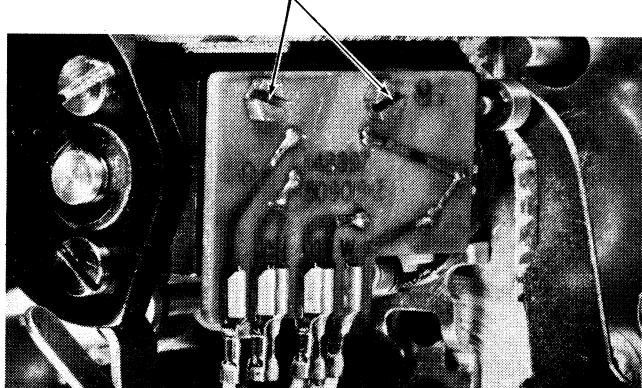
Print Feedback Removal (Circuit Board Removal)
